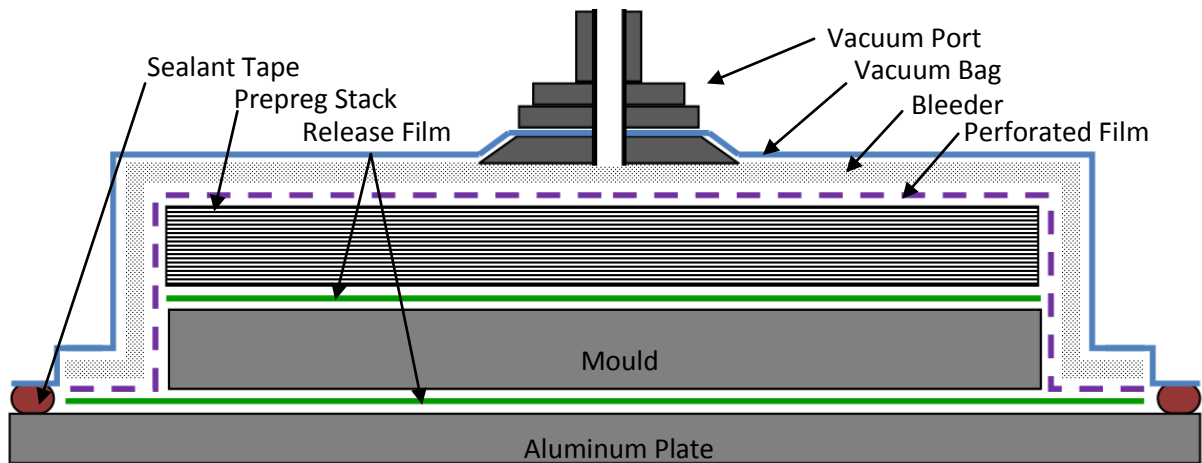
Vacuum bagging method for manufacturing CFRP - Adapted from [29].
